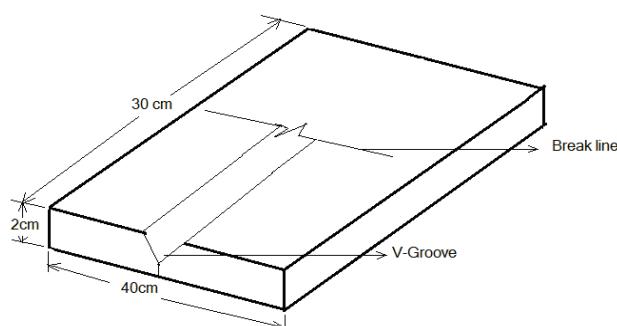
Two pieces of mild steel plates were welded and V-groove for the purpose was 60°
